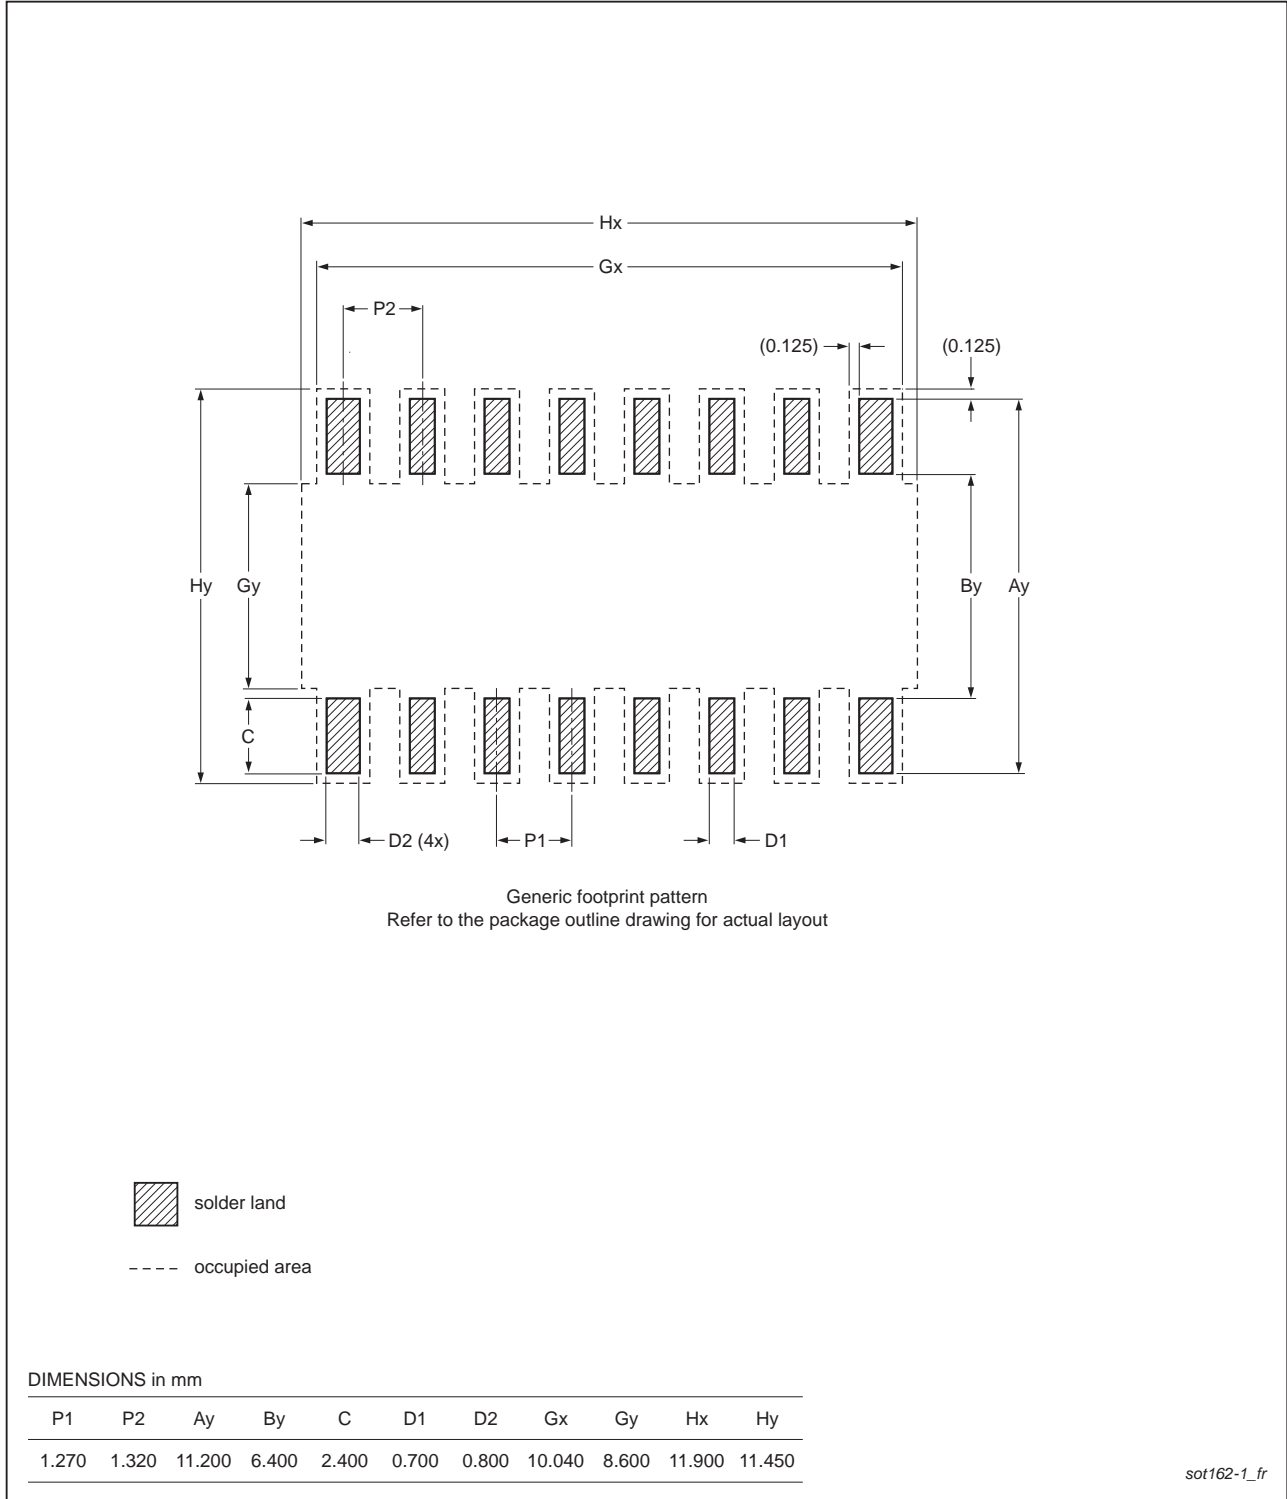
PCB footprint for SOT162-1 (SO16); reflow soldering
